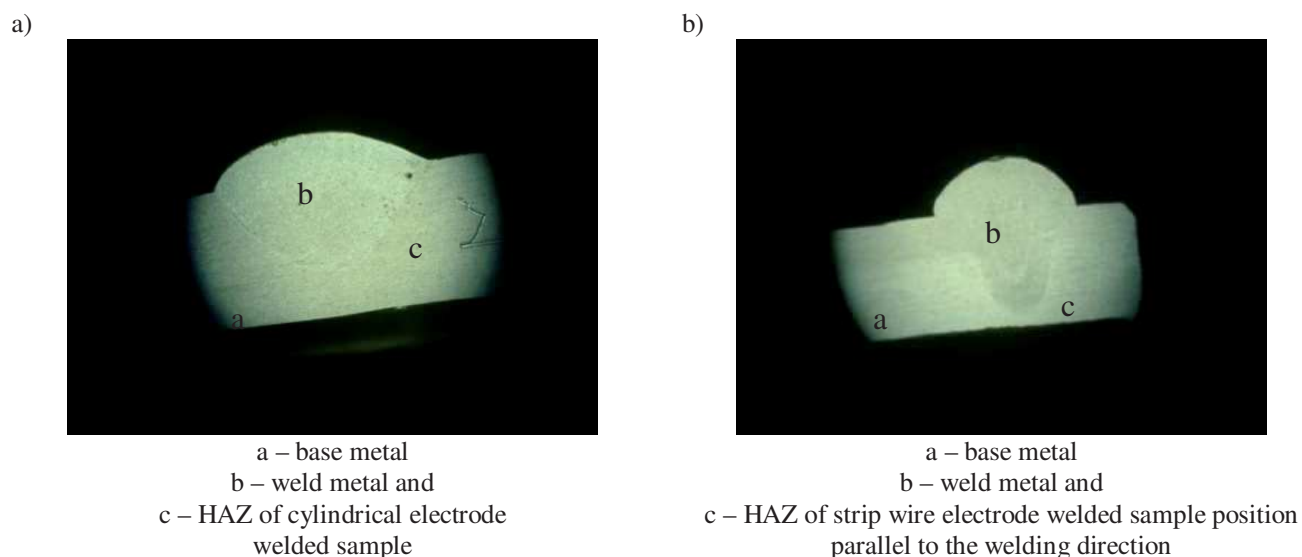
Weld samples: a) weld macrograph of weld bead and penetration profile welded with cylindrical electrode, b) weld macrograph of weld bead and penetration profile welded with strip wire electrode parallel to welding direction
